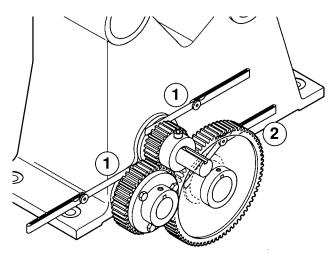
Use a feeler gauge to set clearance between gears and thrust washers. (1) .004" (.102mm), (2) .007" (.178mm).
